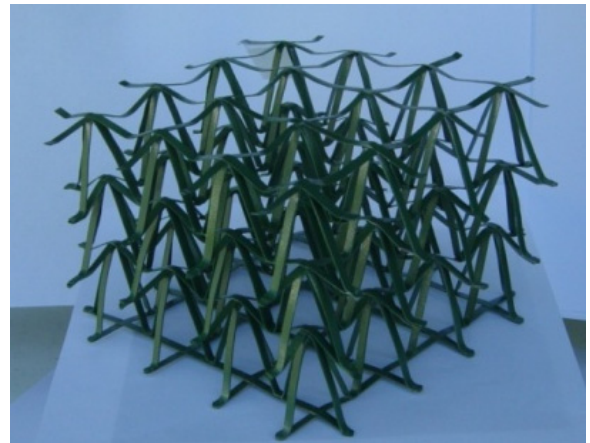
Example prototype of the 3D NPR material (made of stainless steel at MKP).
